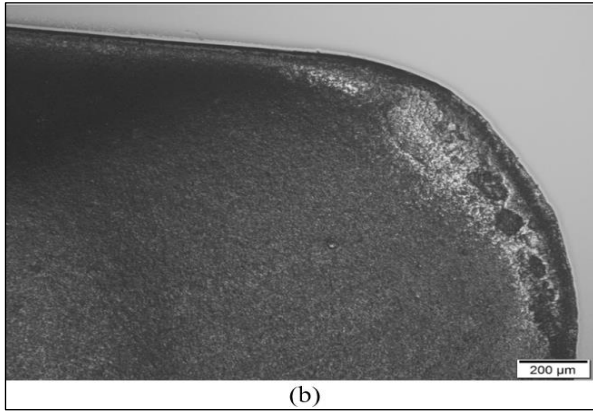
Wear on the cutting tool rake surface with insert 0,8 mm: (b) With sealant. Source: Authors, (2022).
